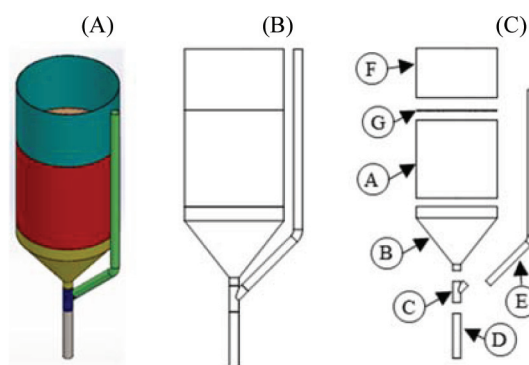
Modified design of laboratory scale prototype (A) pictorial view of washing machine; (B) front view; (C) exploded view, where A = water tank, B = funnel, C = Y-junction, D = sand collector, E = drain outflow tube, F = new extension tank and G = perforated dual-disc check valve (drawn to scale)
